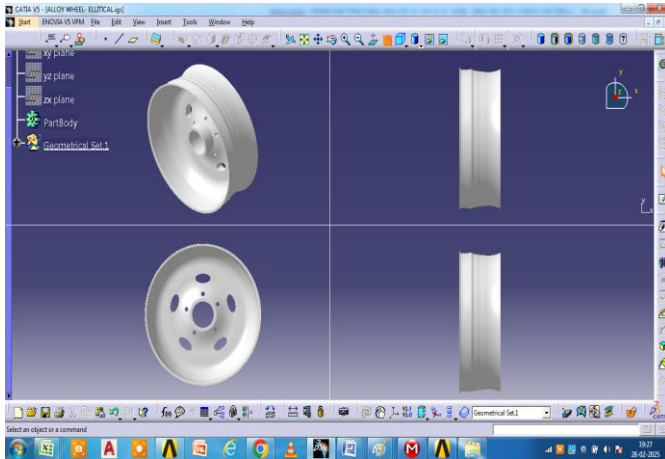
Multi View of Elliptical Spokes Shape of Alloy Wheel RIM
